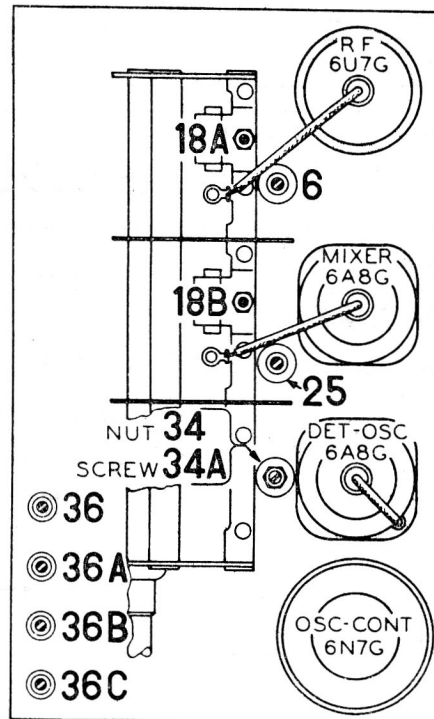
Top View of R. F. Unit Showing Compensator Locations
